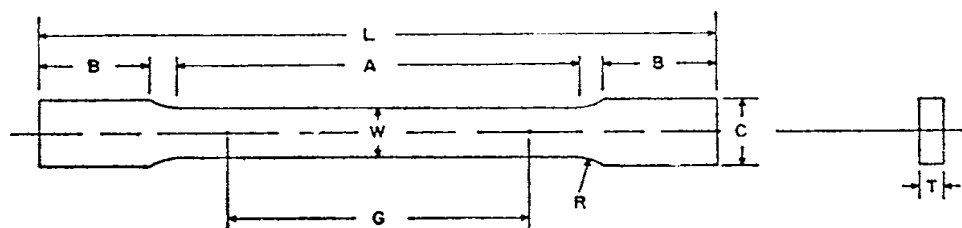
tensile test specimen standard dimension (Davis, 2004)
